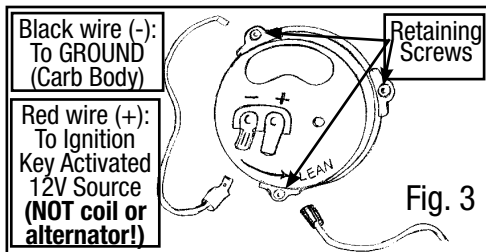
Reinstall the screw and connect the clip end of choke ground wire to negative (-) terminal on the choke housing. The red POSITIVE (+12V) connects to a "Key Activated" 12V source.
